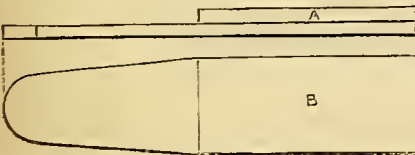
HONE. A, Elevation. B, Ground Plan.
